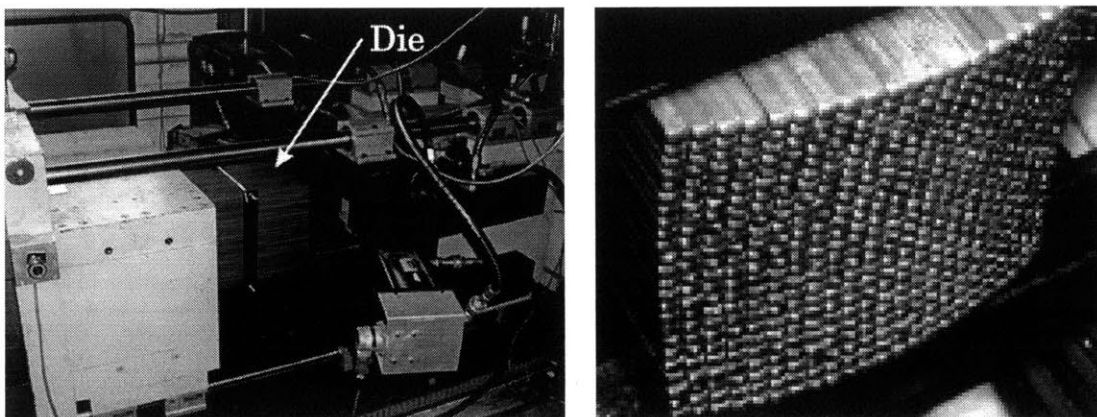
Manufacturing process control laboratory's stretch forming machine (left) and die surface detail (right). Die surface dimensions of 11.5 in x 12 in.
